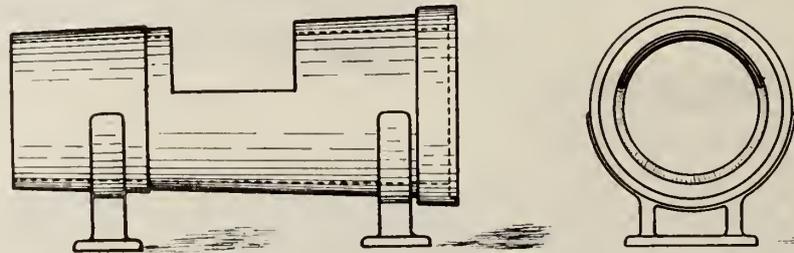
JIG FOR TESTING TAPER AND OUTSIDE DIAMETER OF BACK ENDS.
